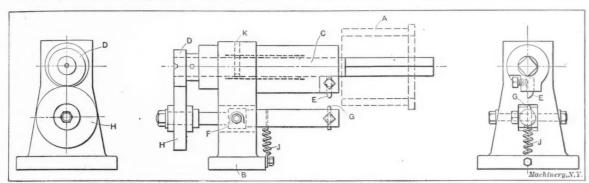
Tool for Boring and Turning Eccentric Rings simultaneously
